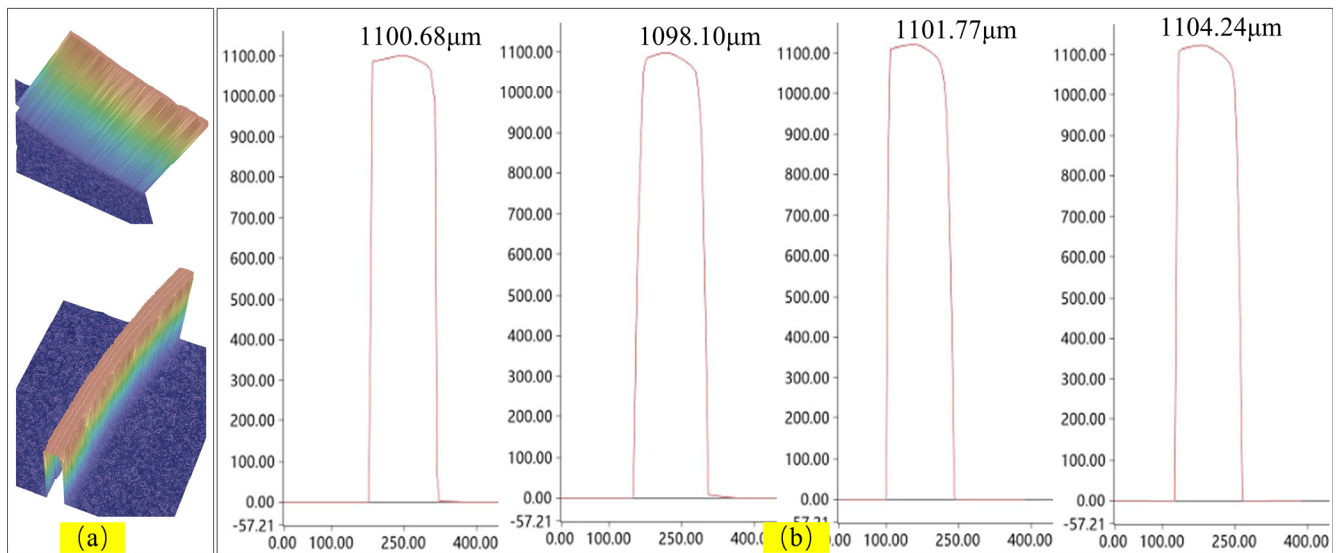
Large aspect ratio annular longitudinal section outline: (a) The 3D shape of the section, (b) Profile measurement of longitudinal section
